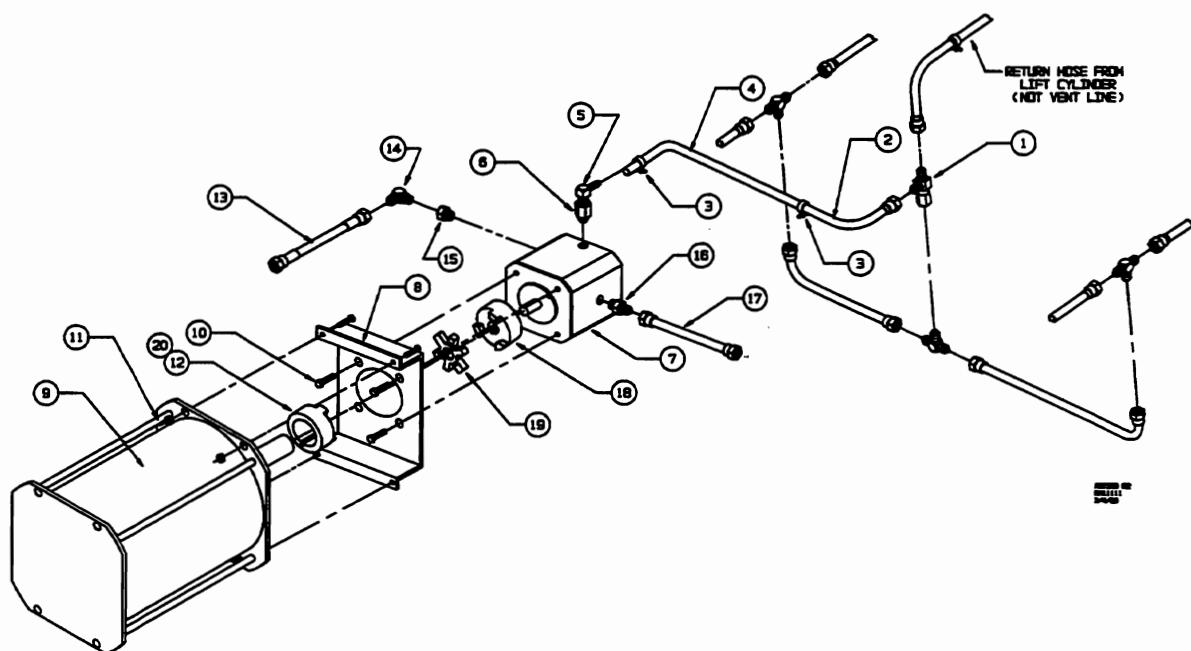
Q - Engine Bulkhead Assembly - Diesel
